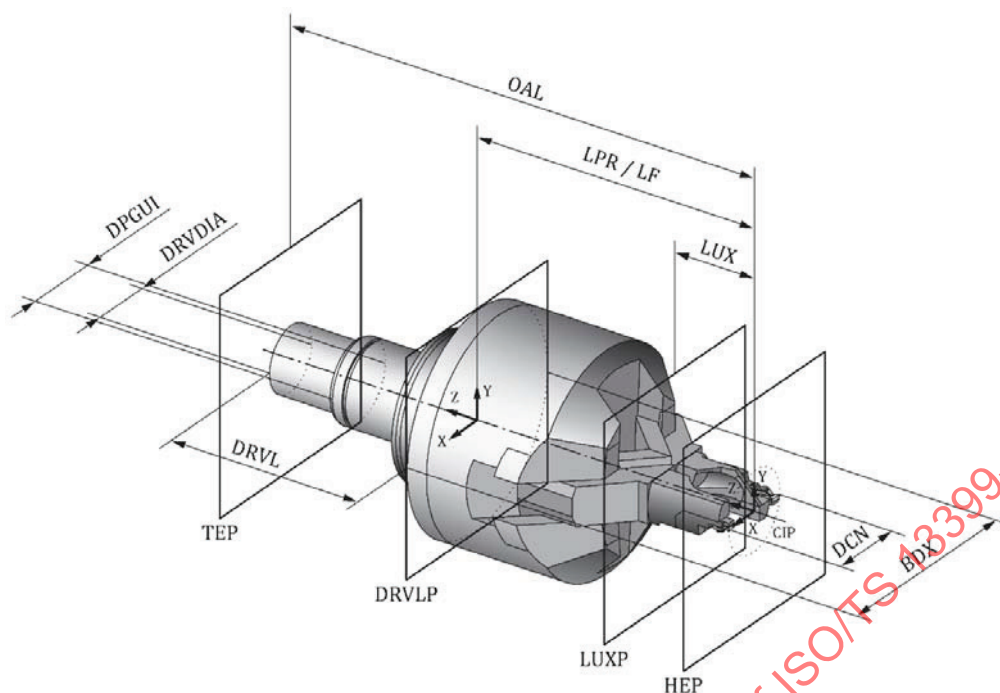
Assembled feed out tool with two inclined slides for internal machining
